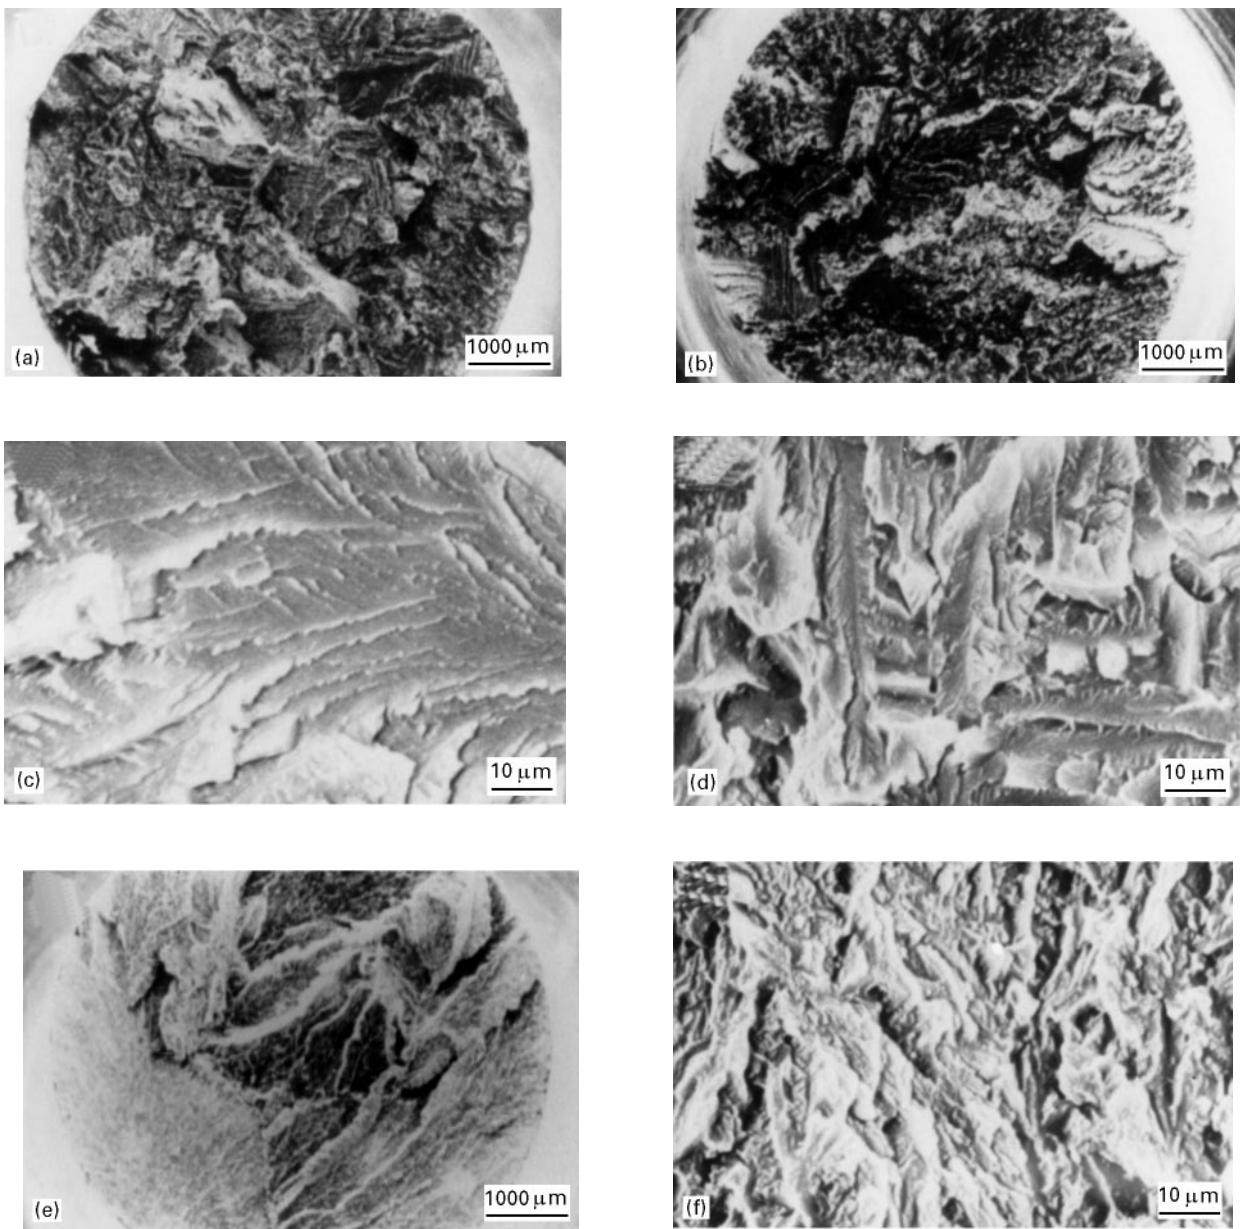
Fracture surface morphologies of smooth cylindrical specimens deformed to failure in tension at room-temperature (a) 982°C/4 h/AC, (b,c) 815°C/5.5 h/AC, (d) 1200°C/0.5 h/FC + 760°C/8 h/AC, and (e,f) 1200°C/0.5 h/AC + 760°C/8 h/AC.
